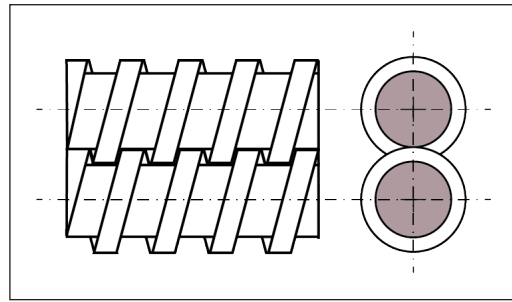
Cylindrical, fully-intermeshing, co-rotating twin-screw extruder
